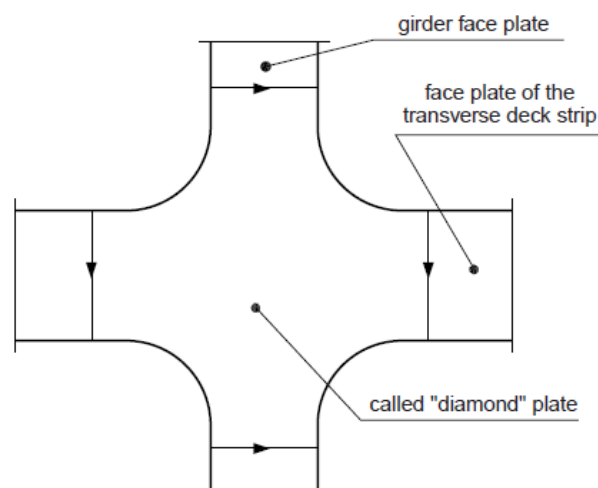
Connection of longitudinal girders between hatchways with face plates of cross decks
